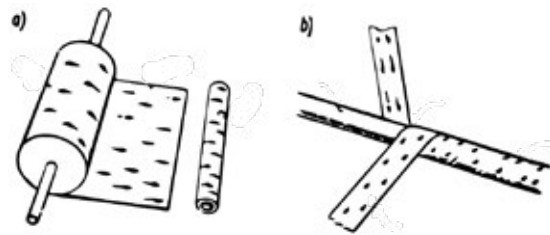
Two methods of paper tubes production a) parallel winding, b) spiral winding
